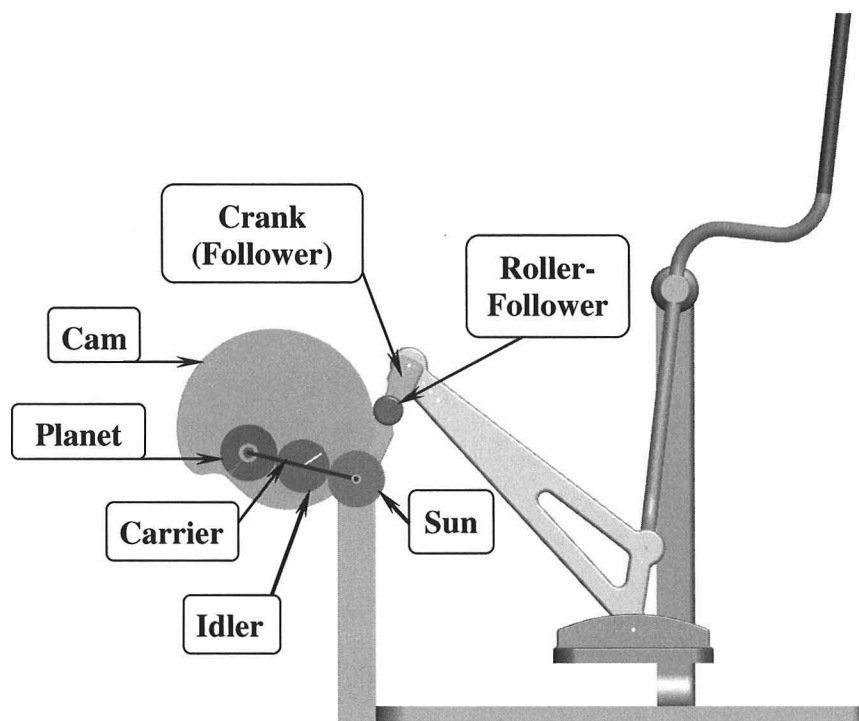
Side view of the mechanical timing mechanism added to the four-bar mechanism.
